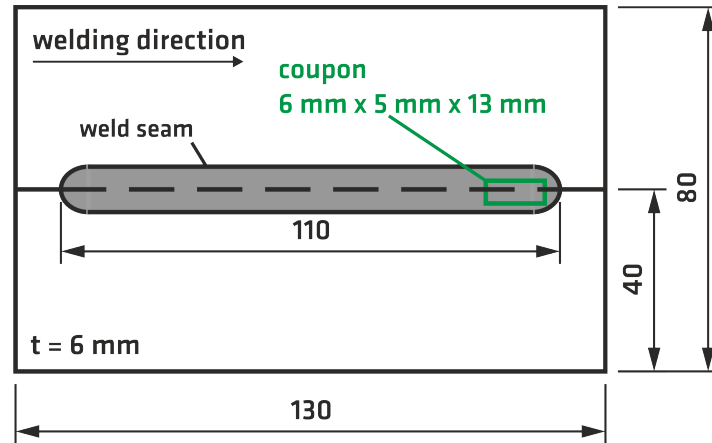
Geometry of plates and position of weld seam with sample A1 being the coupon marked in green; all measures are in mm
